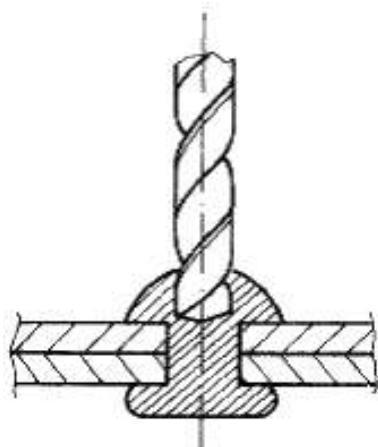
Drilling of rivets (solid rivet displayed)
